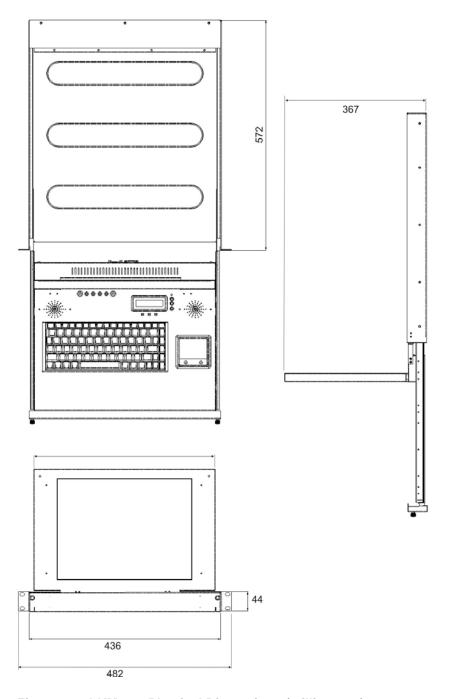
LKM-927 Physical Dimensions (millimeters)
